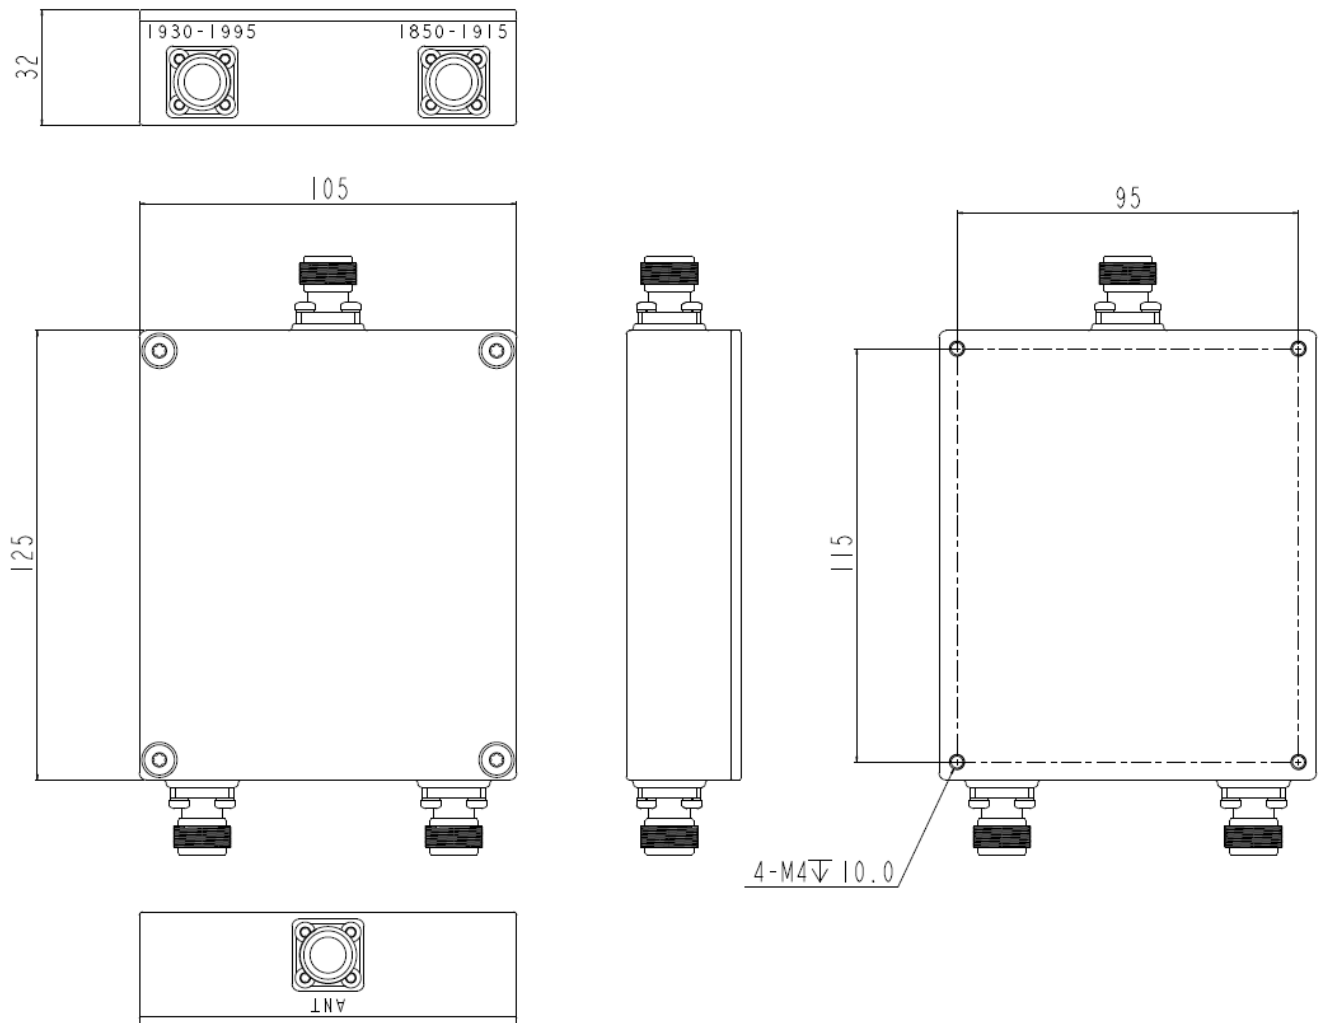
JX-CD2-1850M1995M-70NWP front panel layout
